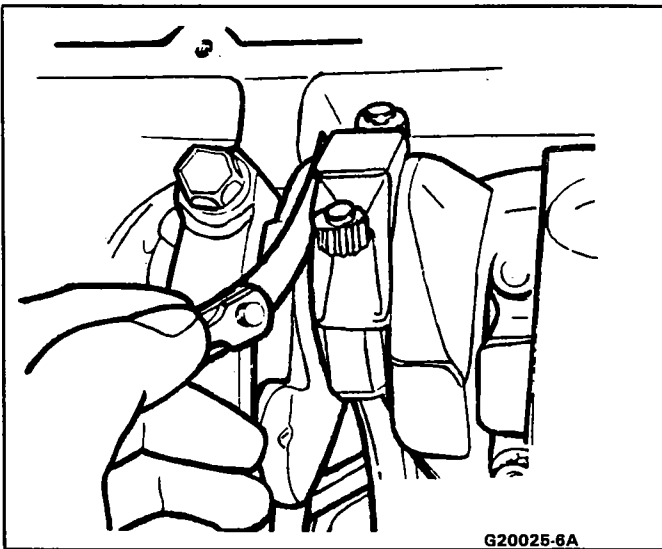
Measuring Connecting Rod Side Clearance (Single Rod Journal)
